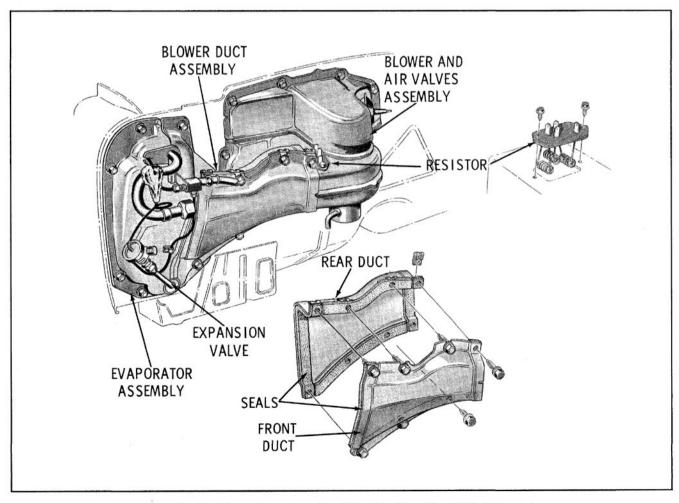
Blower Duct Assembly (33 - 34 - 35 - 36 - 38 & 39 Series)
